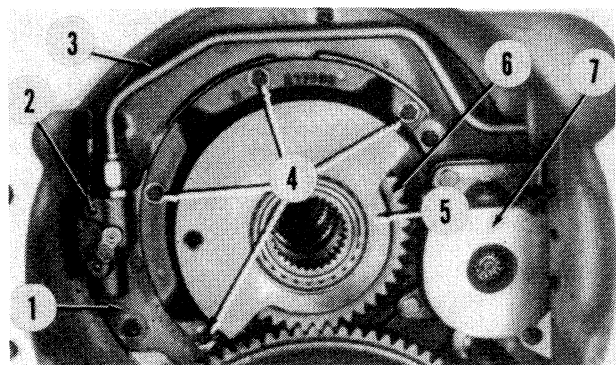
View of pto drive gears with clutch housing separated from engine.
